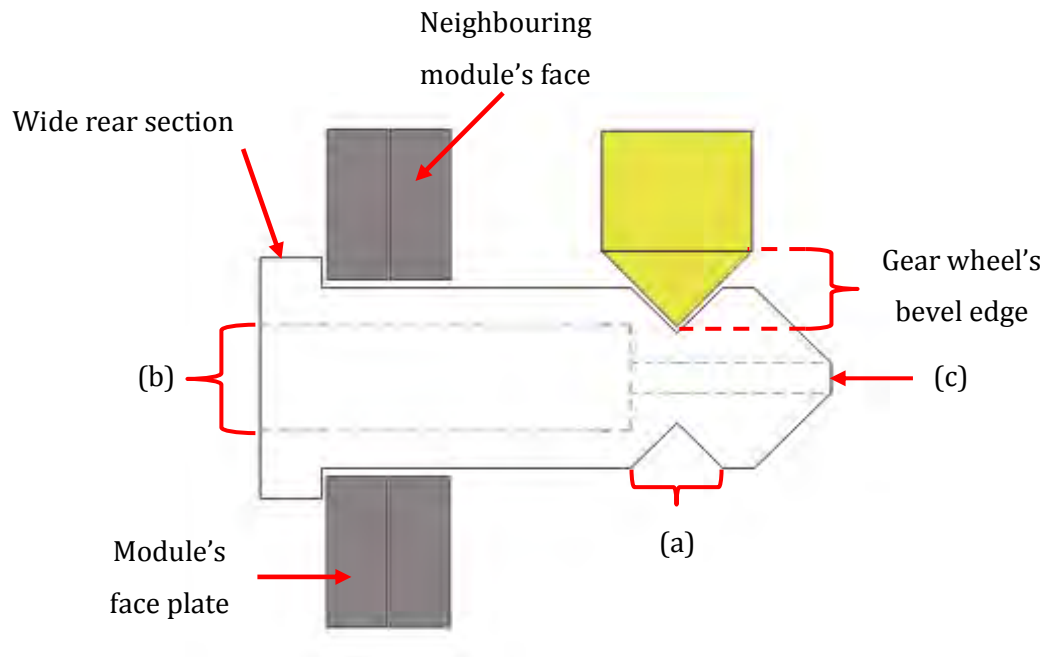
Cross-sectional view of a mesh between a module's gear wheel and a neighbouring module's docking bolt. Also visible is the docking bolt's (a) bevel groove, (b) spring and rod groove and (c) ground pin groove.
